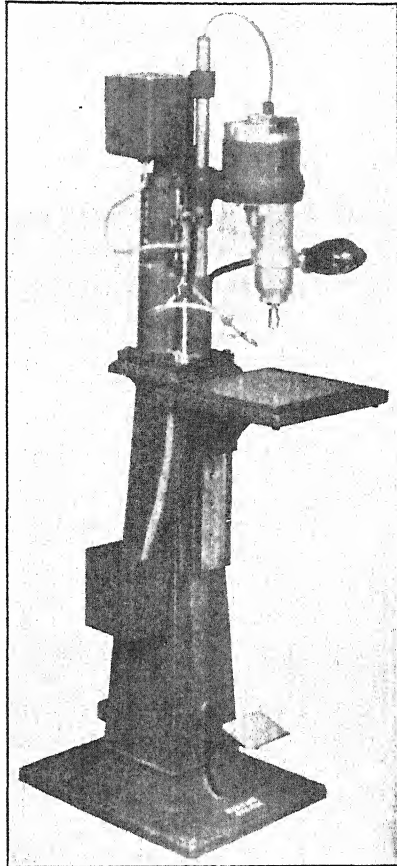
R. G. Haskins Co. High-Speed Tapping Machine.
